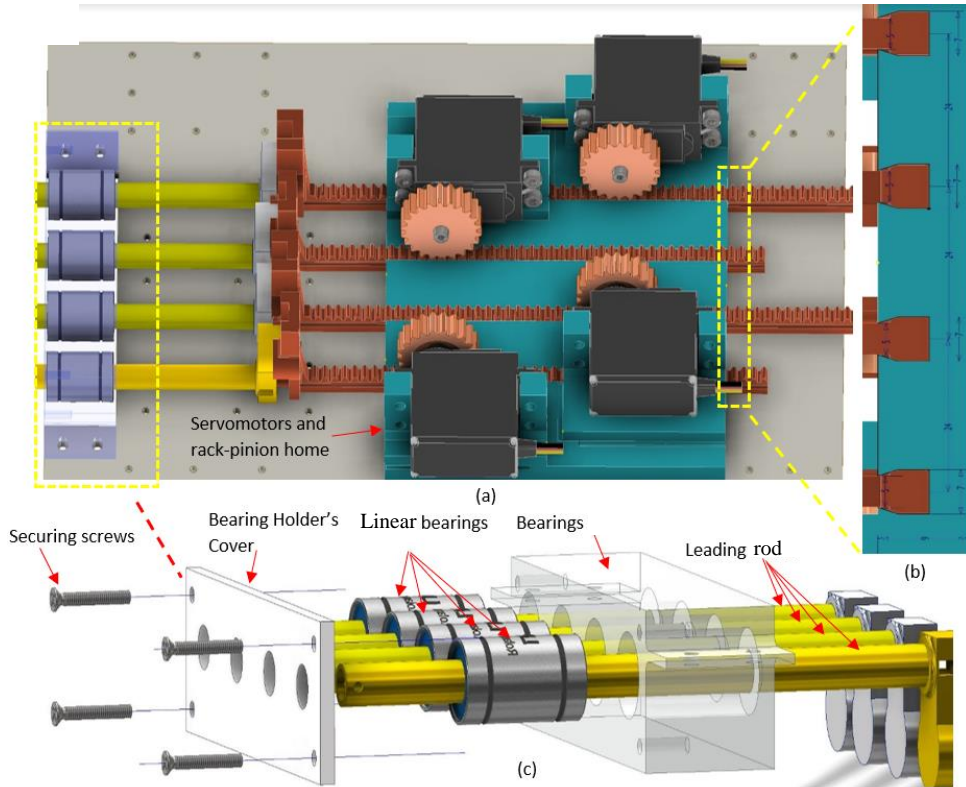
Ultimate 3D design of four-driving mechanism assembly:
